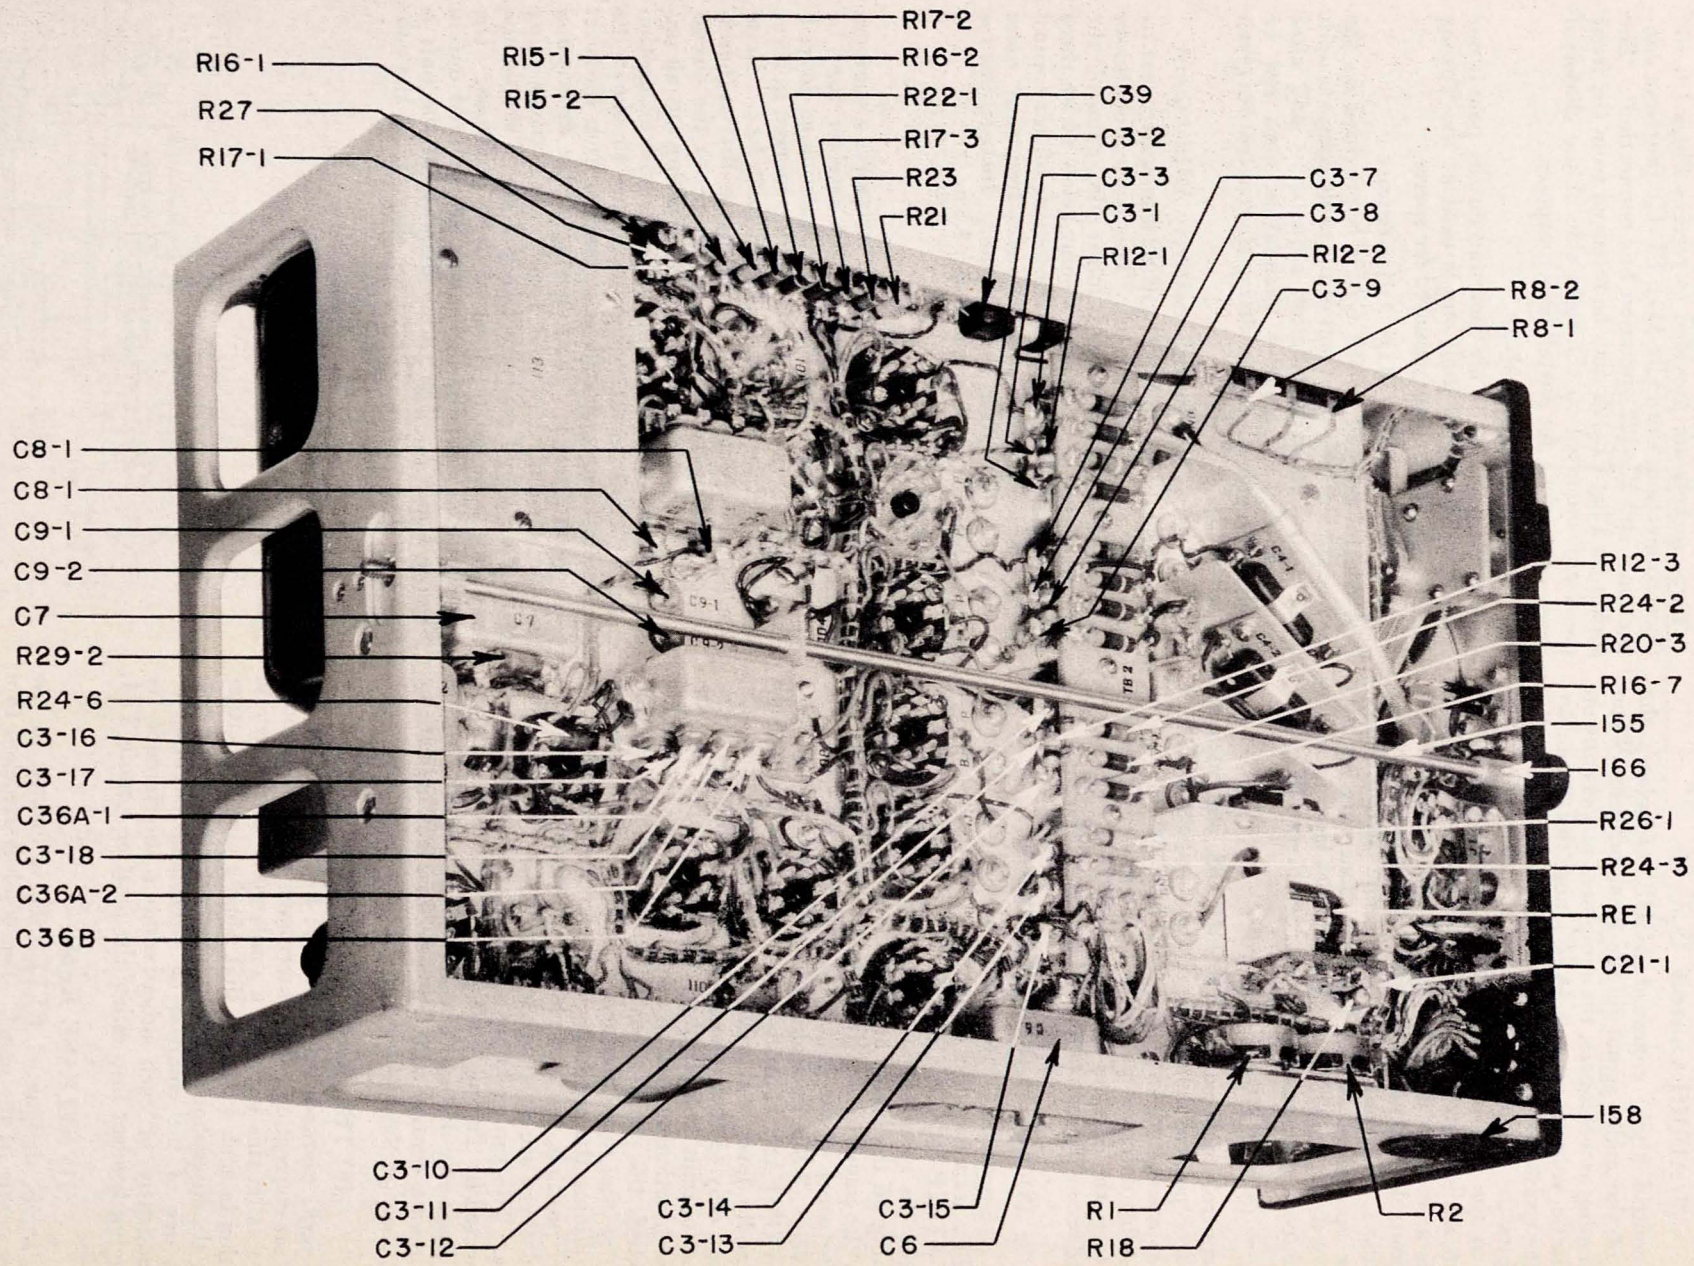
RADIO COMPASS UNIT BC-310-B, BOTTOM OF CHASSIS—REAR
